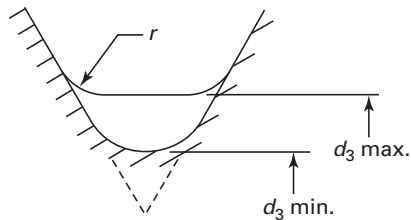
Minor Diameter, External Thread (Rounded Form)
